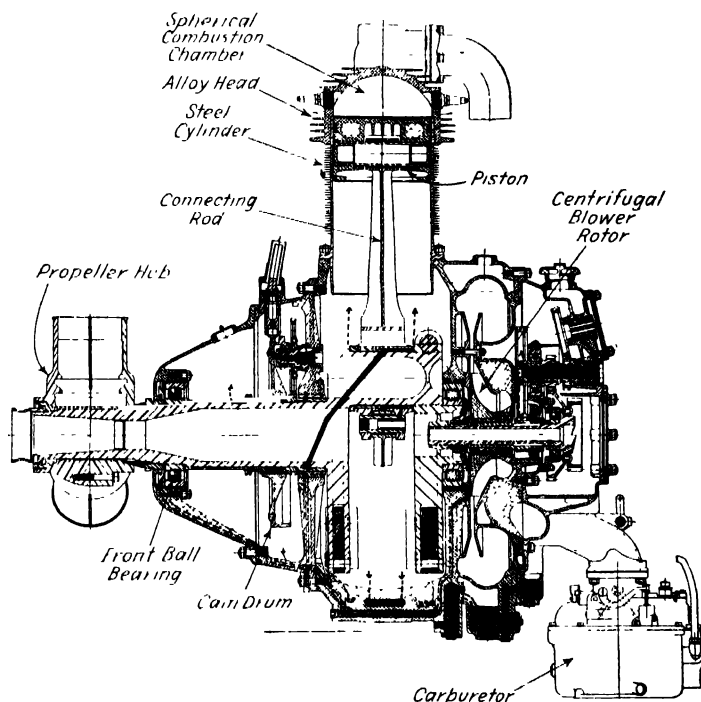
Part Sectional View of Wright "Cyclone" Engine Showing Lubrication System and Construction of Internal Mechanism. Note Centrifugal Supercharger Installation.
